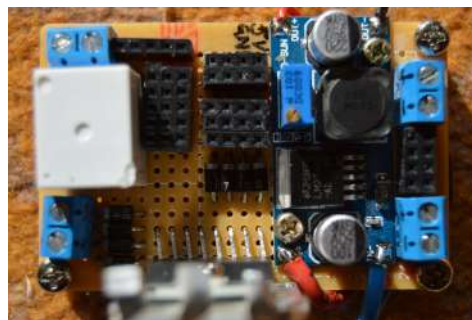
Custom PCB top view: vacuum pump relay (left), L298N H-bridge IC (center-bottom) and buck converter (right).
